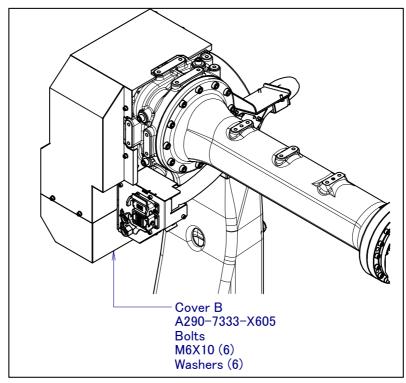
(r) Mounting the J3-axis adjustable mechanical stopper (1/3) (R-2000*i*C/165F/210F/240F/125L/165R/210R)
